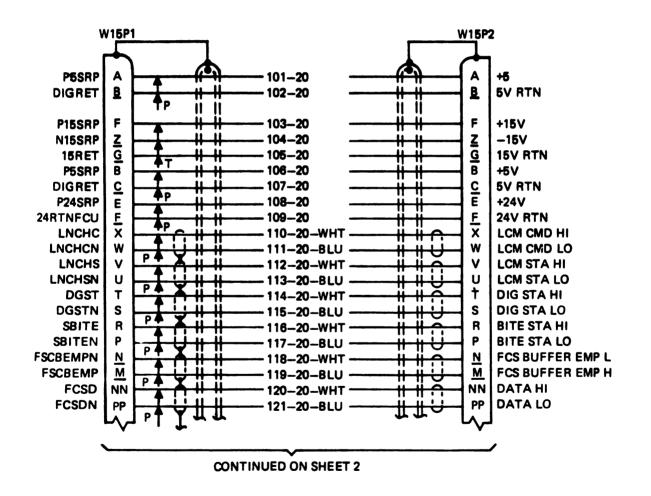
W15 Cable Assembly Wiring Diagram (Sheet 1 of 2)
